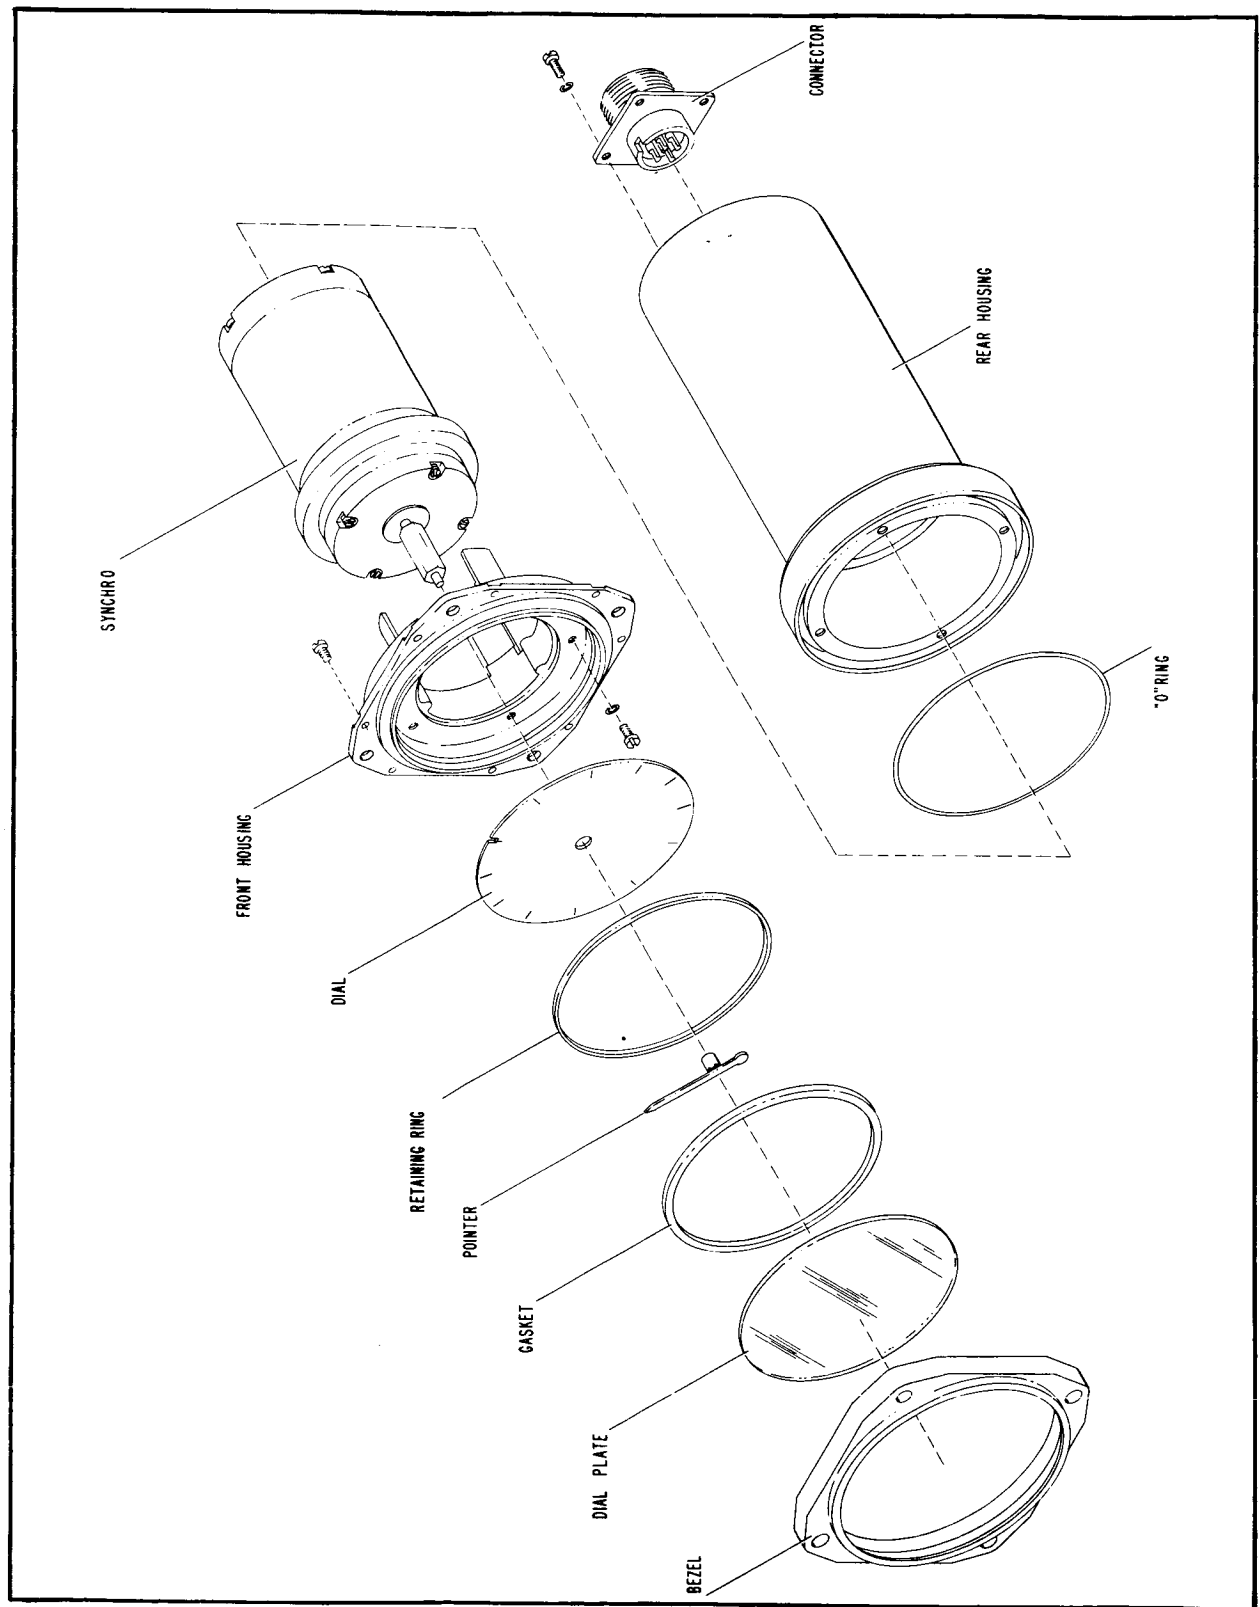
Acquisition Data Console Synchro Receiver, Exploded View
